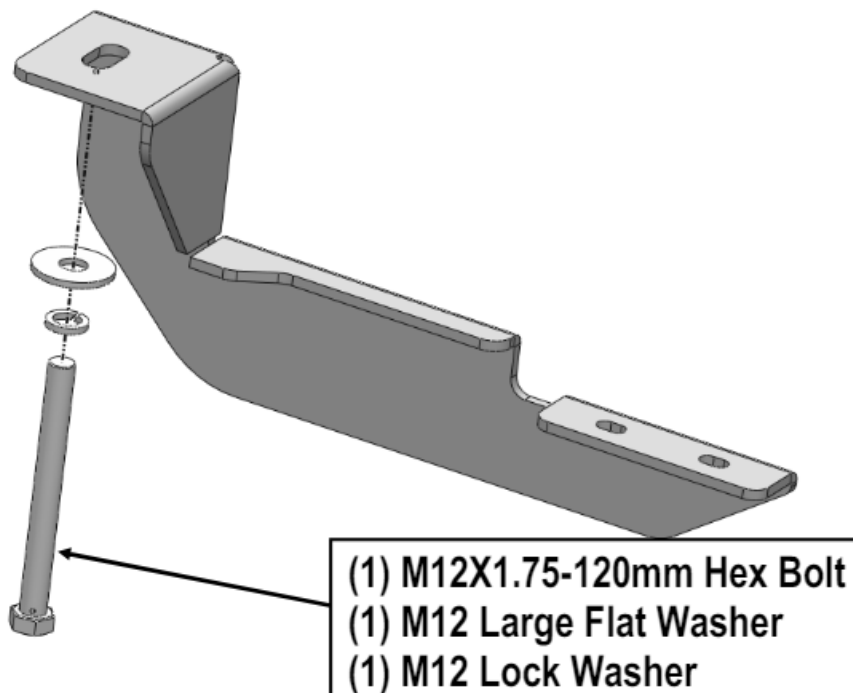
Example Of Gm Factory Body Mount Bolt
